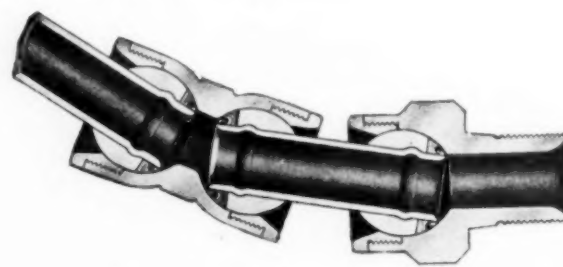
DORMAN FLEXIBLE STEEL PIPE
